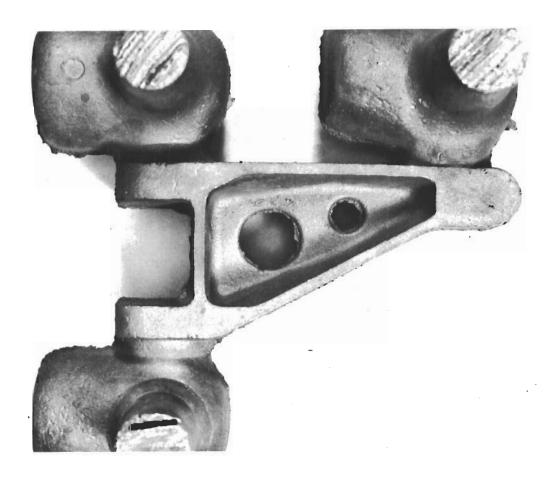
Experimental Bracket Casting - Mold Mix 80
